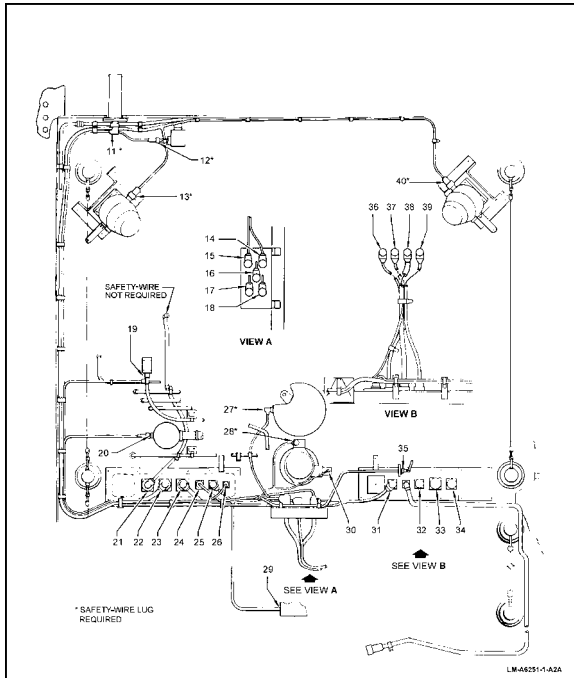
Safety-Wire Locations (Base Enclosure Assembly - Cont.)
